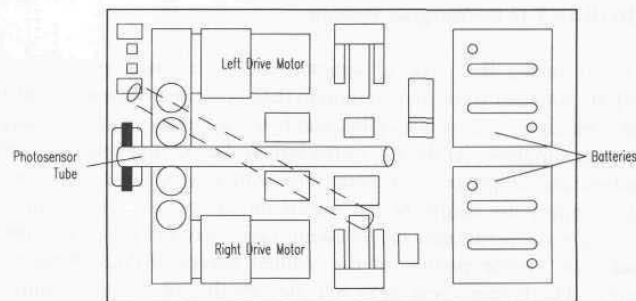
Top view of componentry layout on the CRAWLER I robot, showing the photosensor collimating tube aligned with the forward axis of travel, and displaced 30 degrees.
